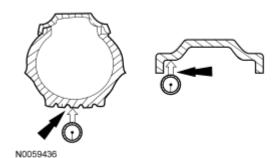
Positioning Floor Jack & Special Tool (303-1295) Under Oil Pan Courtesy of FORD MOTOR CO.
